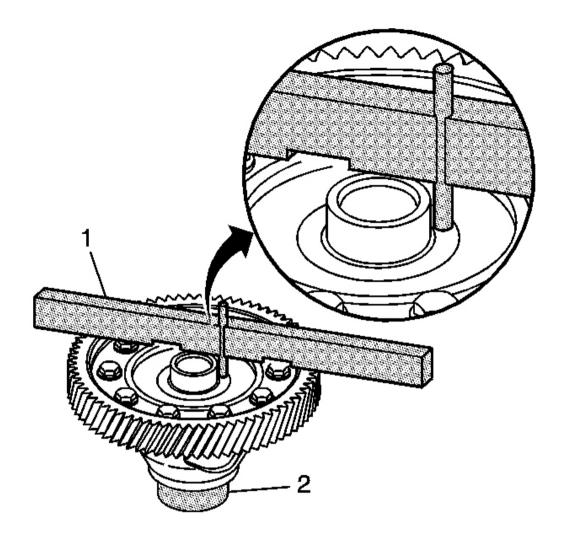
Left Differential Side Bearing Shim, Gage Rod & J 44388-1 Courtesy of GENERAL MOTORS CORP.
